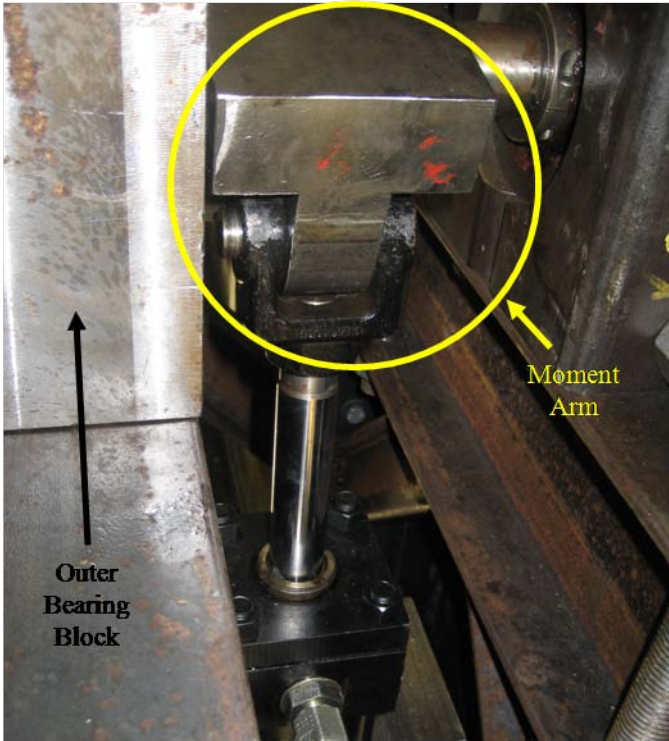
Moment arm attached to linear actuator and cylindrical shaft
